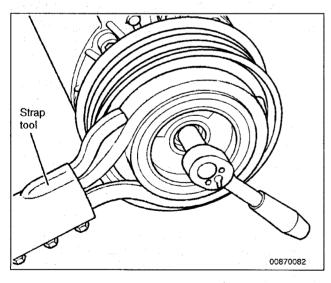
A/C compressor drive plate can be held stationary with strap tool to allow removal of retaining bolt.
